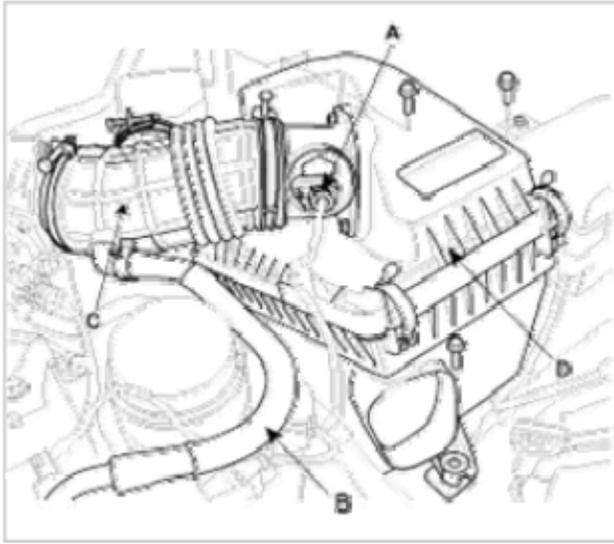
Identifying AFS Connector, Breather Hose, Intake Air Hose And Air Cleaner Body
